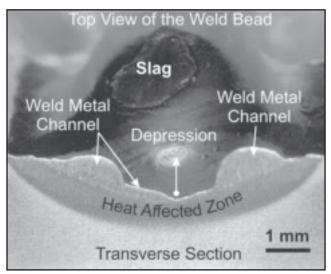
The transverse section and the top view at the depression of a GMA weld with discontinuous weld bead defect. The weld was made using 10 kW welding power, TIME<sup>TM</sup> shielding gas, and 30 mm/s welding speed.
